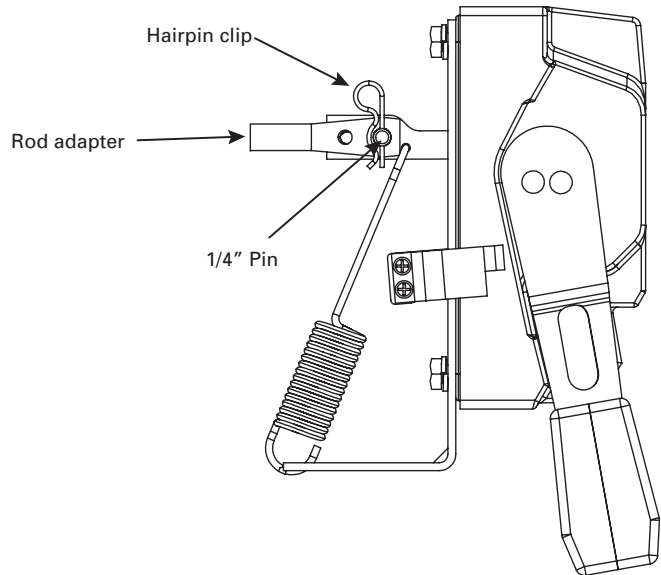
Install rod adapter using 1/4" pin and secure with hairpin clip.
